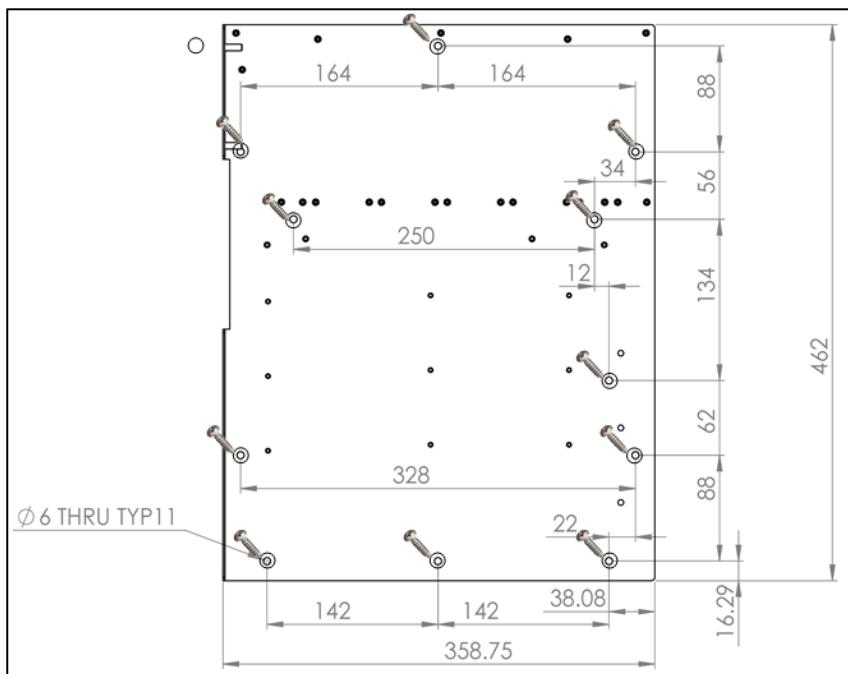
Platinum Pro 30 and Platinum Touch 30 Back Panel Dimensions
